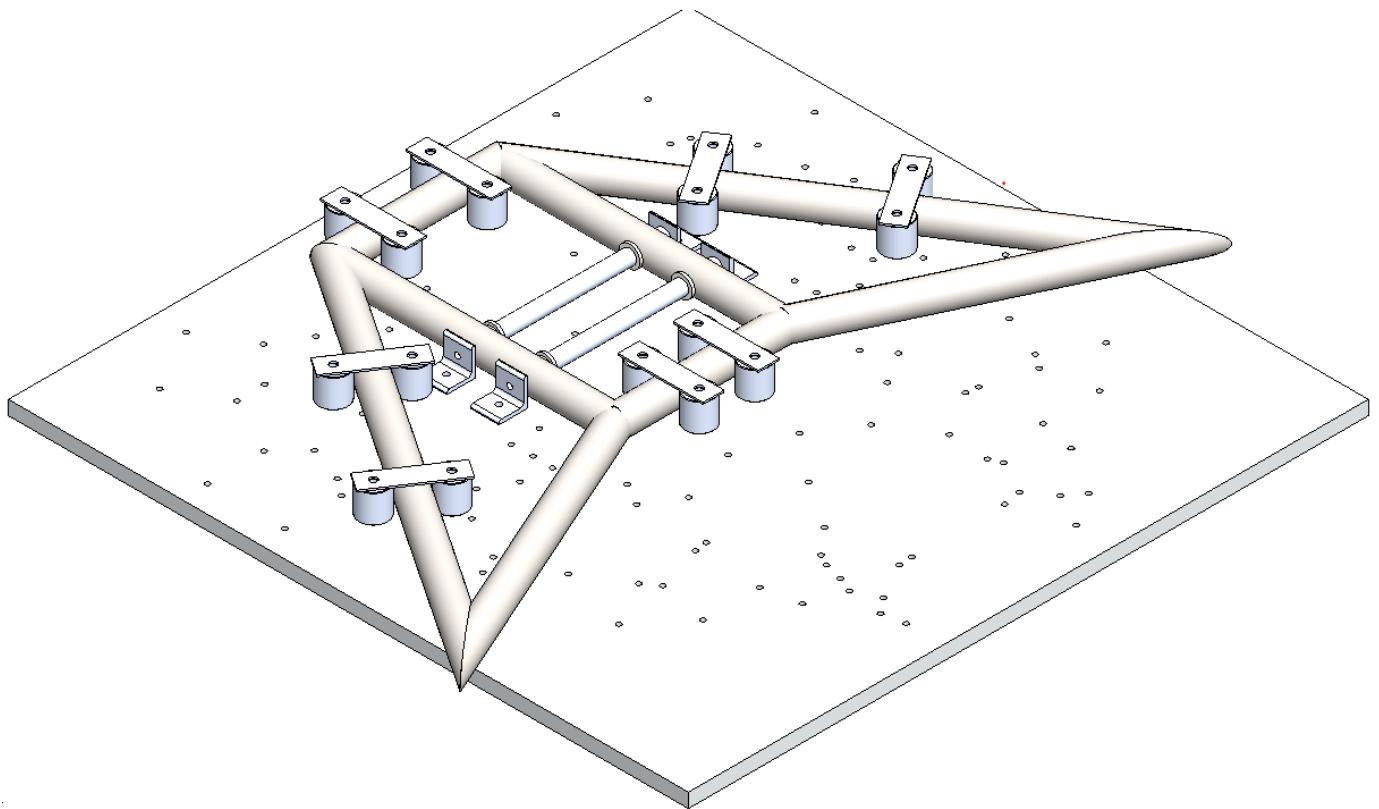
CAD Model of Planar Jig for Planar Section of Engine Bay
